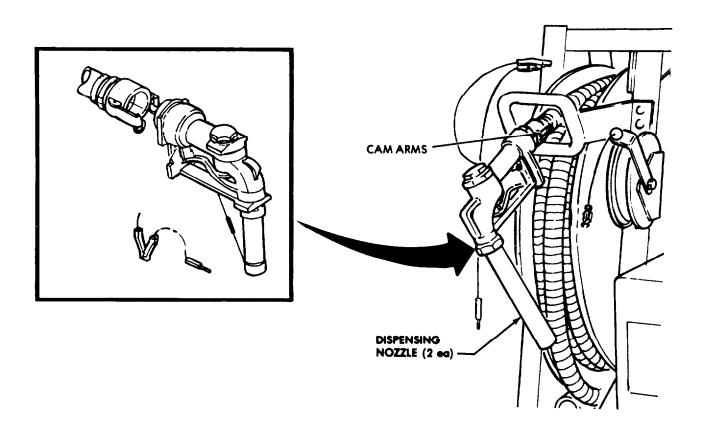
Fuel Dispensing Nozzle Assembly.
